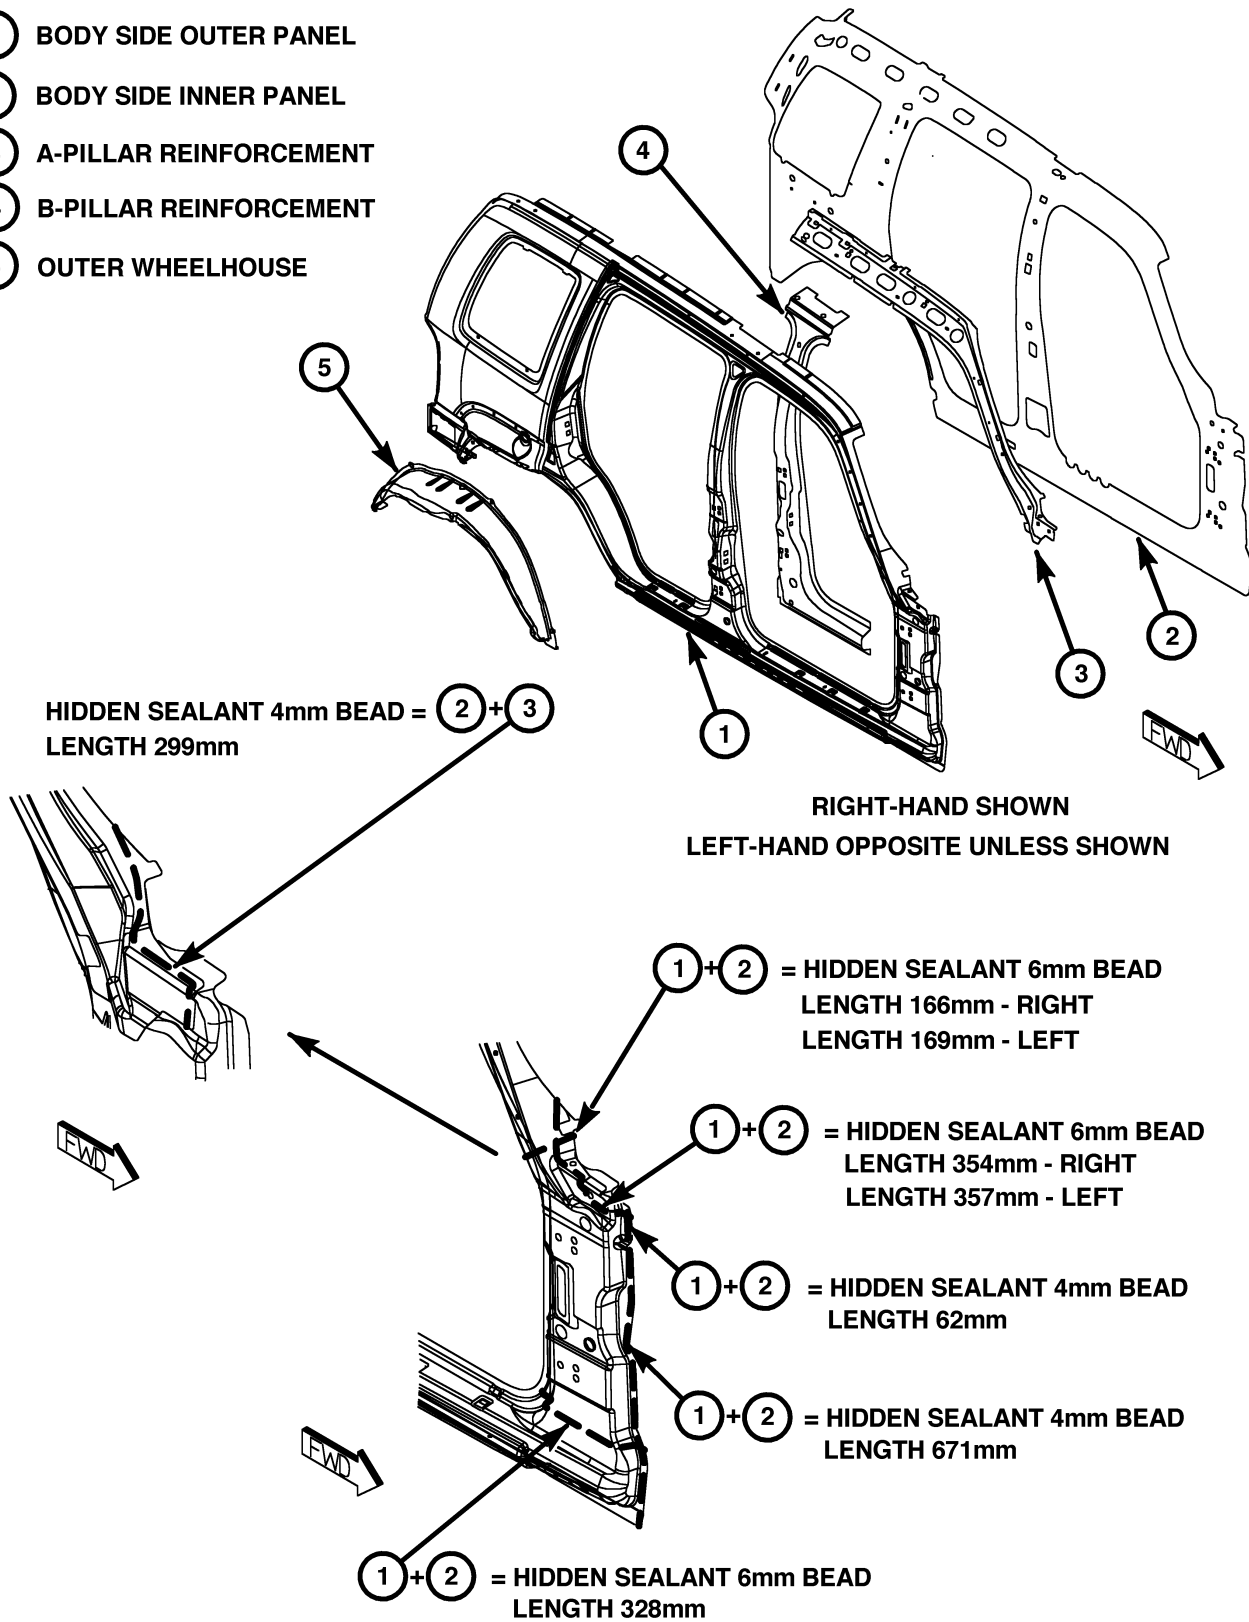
BODY SIDE PANEL ASSEMBLIES
